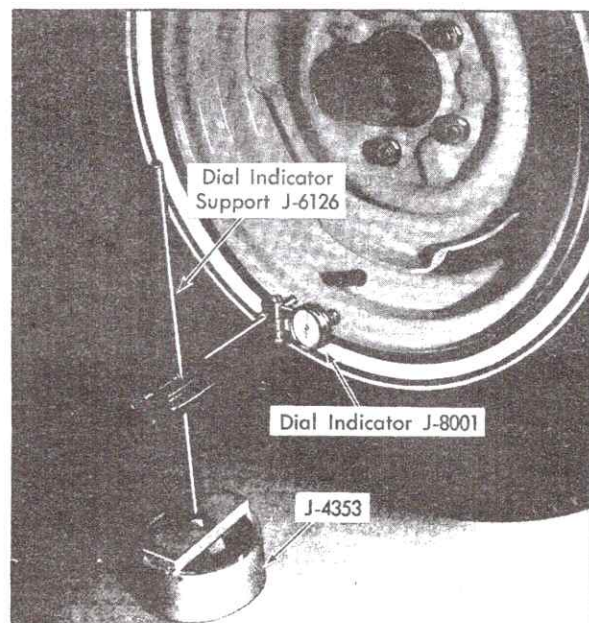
Checking Lateral Runout At Bead Seat (Except 693)
